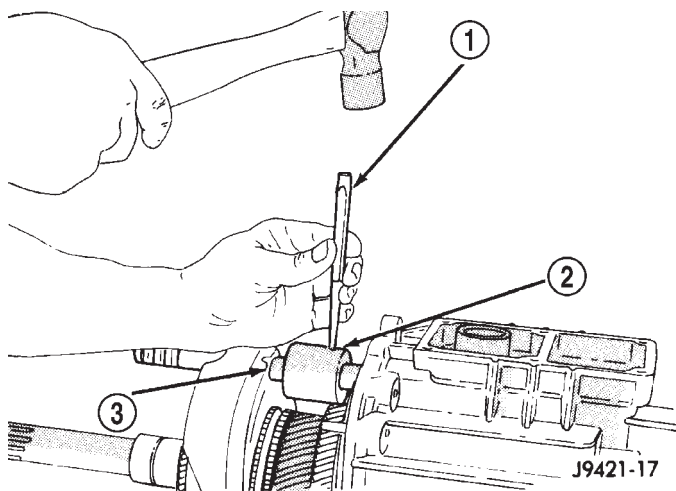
Removing Shift Shaft Lever And Bushing Roll Pin
